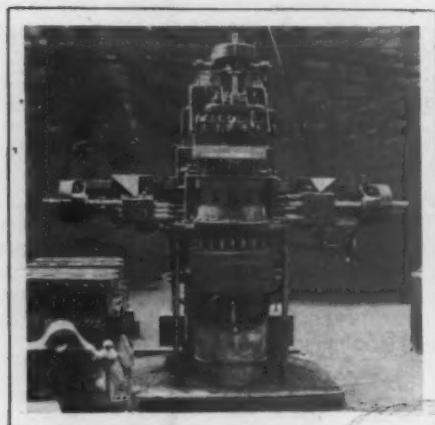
Multiple Drilling Machine, Drilling 45 Holes Simultaneously
